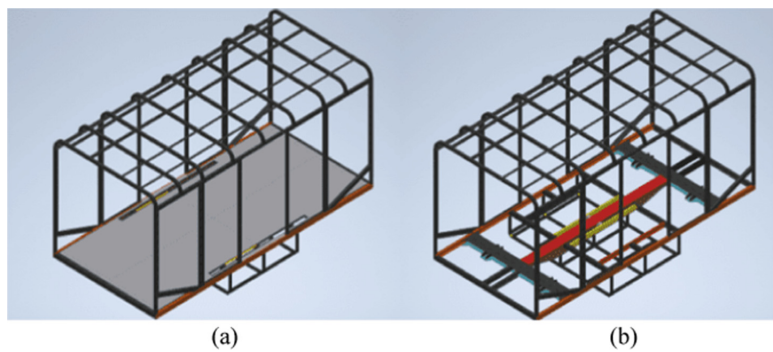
Tram Mover (a) Carbody Design (b) Carbody Model
